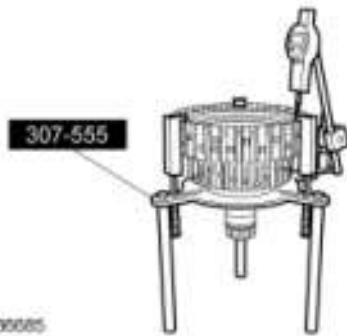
Installing Direct Clutch Assembly Into Special Tool (307-555)
